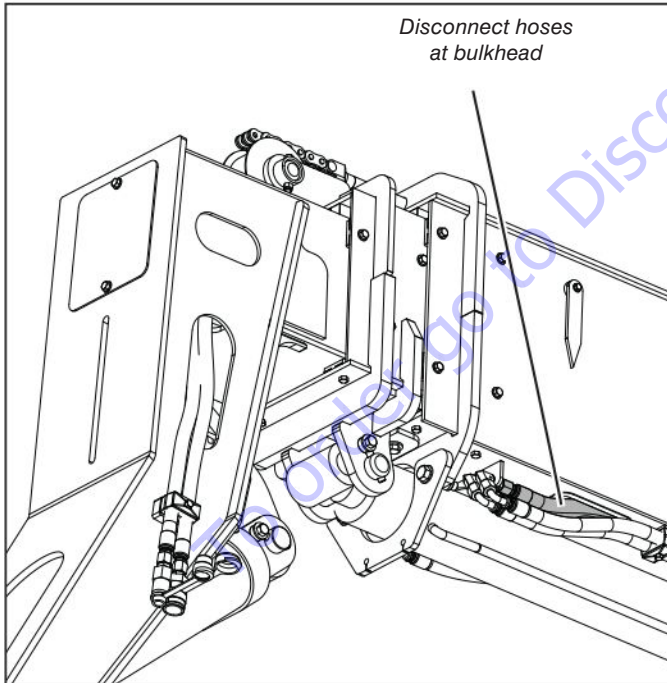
Aux. Hydraulics Hoses Removal at Bulkhead
